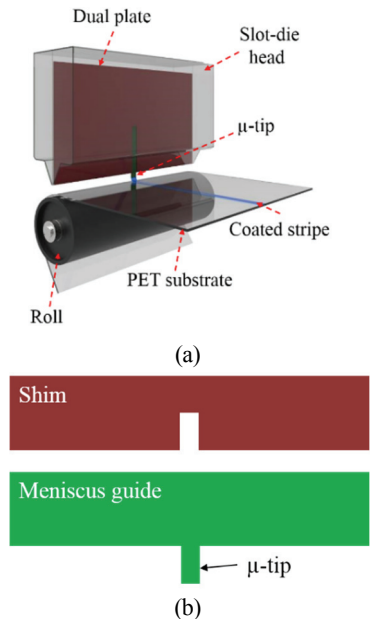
(a) Schematic view of roll-to-roll (R2R) stripe coatings and (b) a shim and a meniscus guide embedded in the slot-die head.
